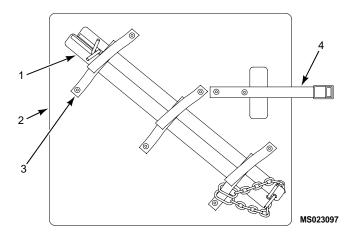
Handrail Safety Bars Stowed on Safety Rail Assembly Mount
